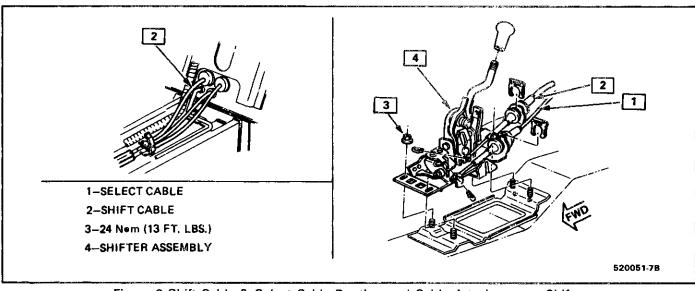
Shift Cable & Select Cable Routing and Cable Attachment at Shifter
